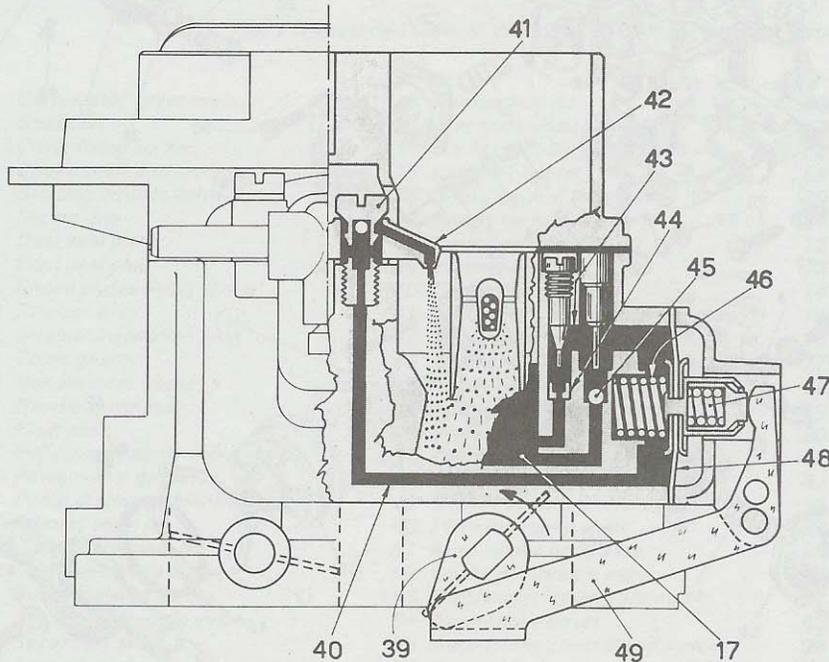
Carburettor acceleration phase (Sec 3)
